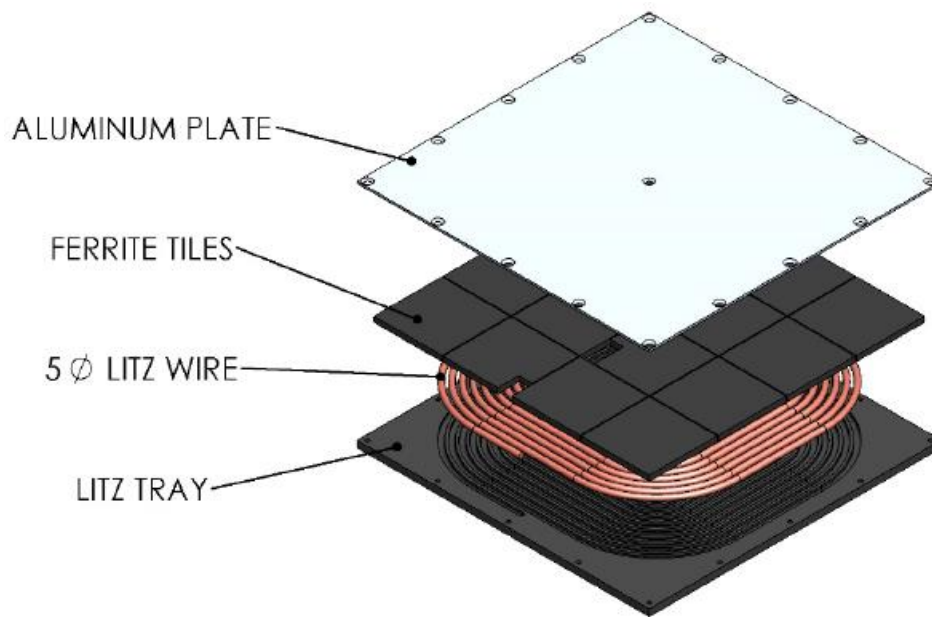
Mechanical dimensions of the VA-WPT2/Z1
